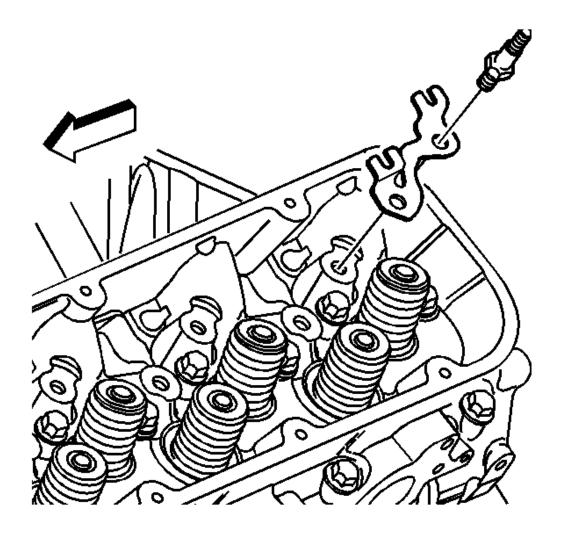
View Of Intake & Exhaust Valve Pushrods Courtesy of GENERAL MOTORS CORP.
